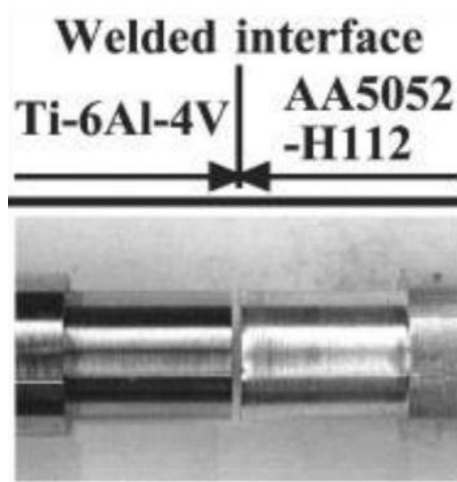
Al-Ti joint made by direct drive rotational friction welding [20].
